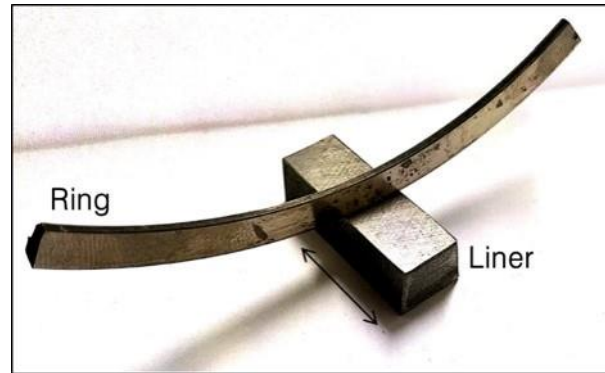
Physical contact between the piston ring and the cylinder liner parts.
